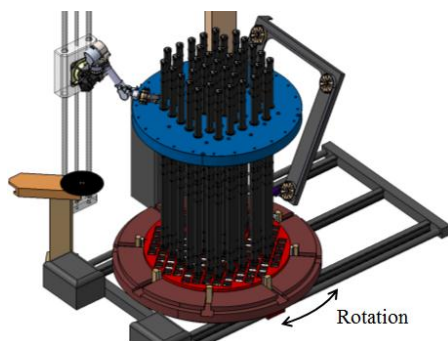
Tube cutting for control rod guide tube of upper internal assembly.
